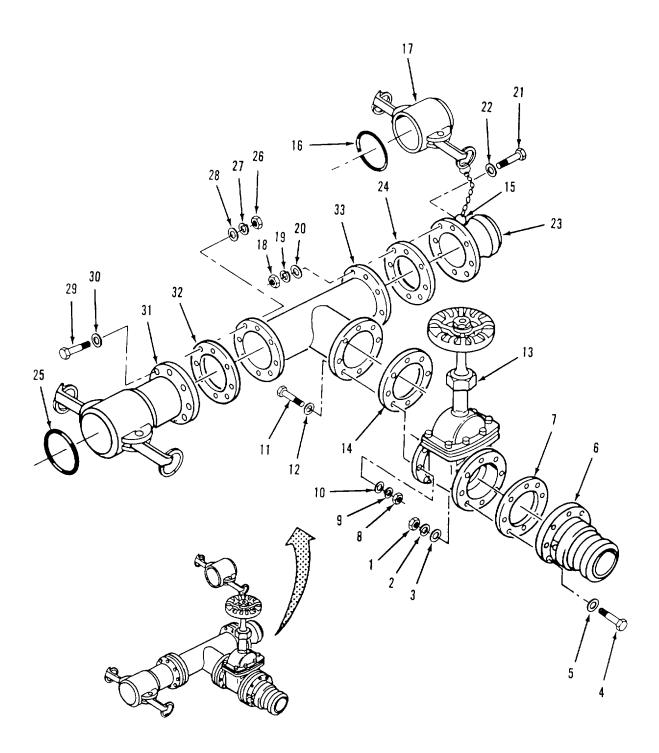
Tee and Gate Valve Assembly (9114-Y2) Assembly.
